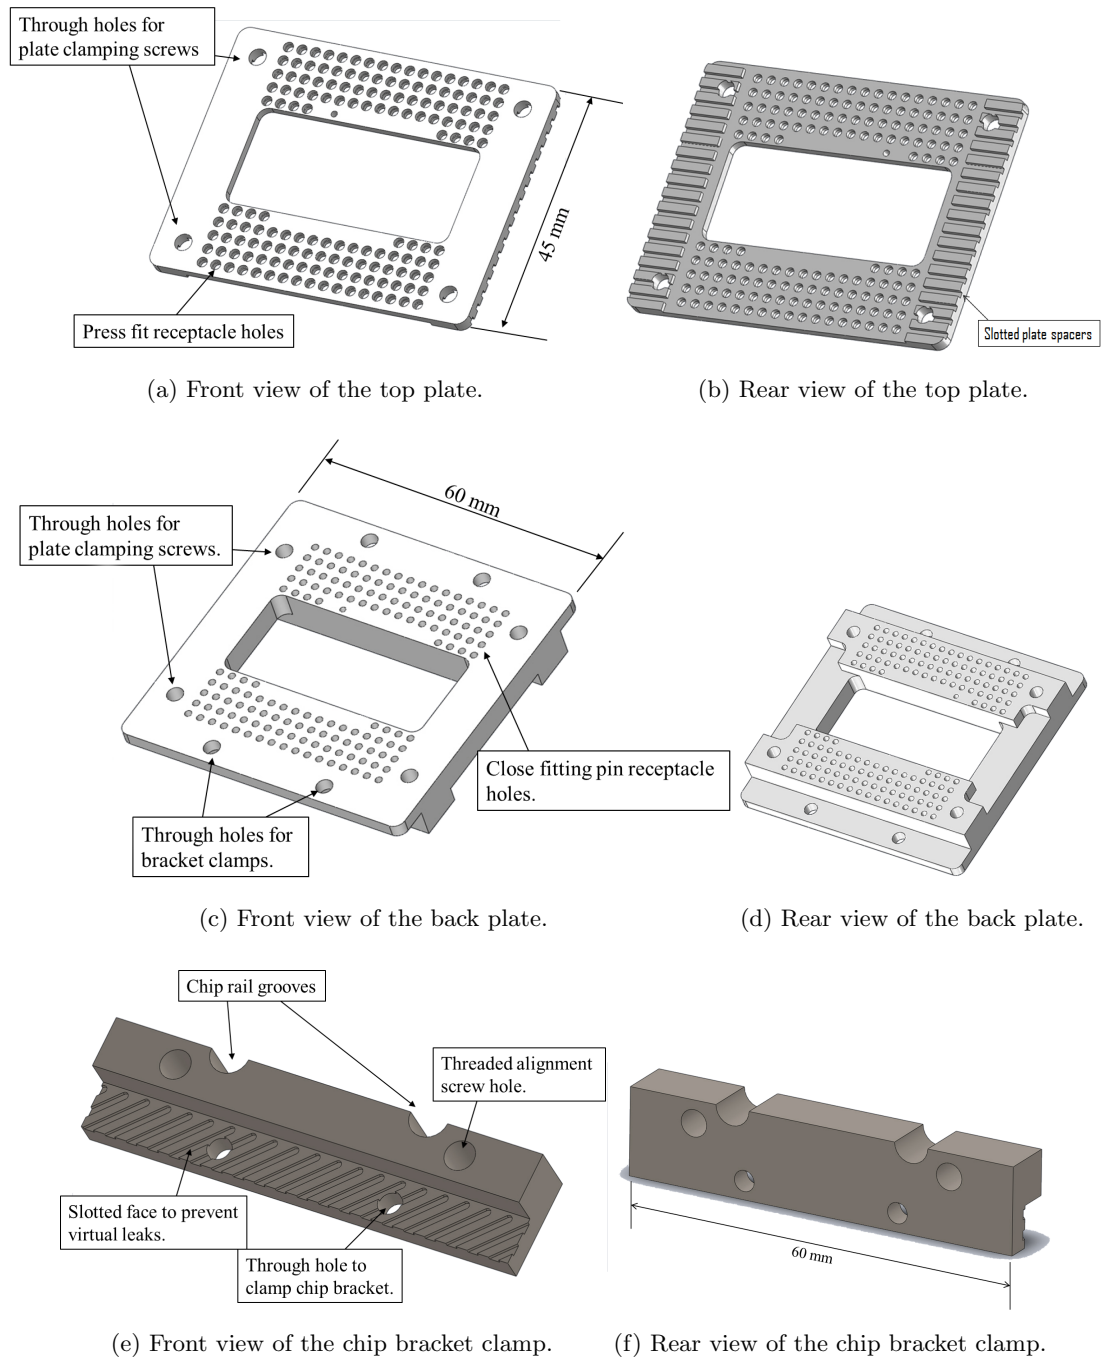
Chip bracket clamps, they screw to the PEEK plates and slot into the chip rail.
